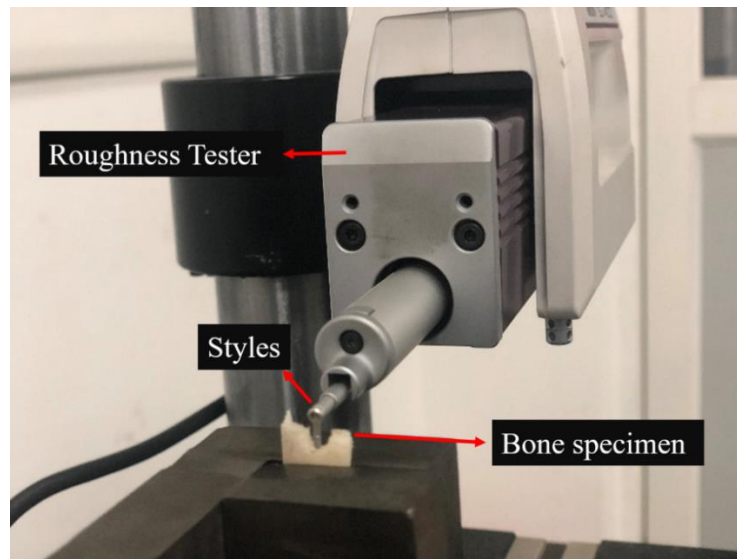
measuring Ra of drilled bone using surface roughness tester
